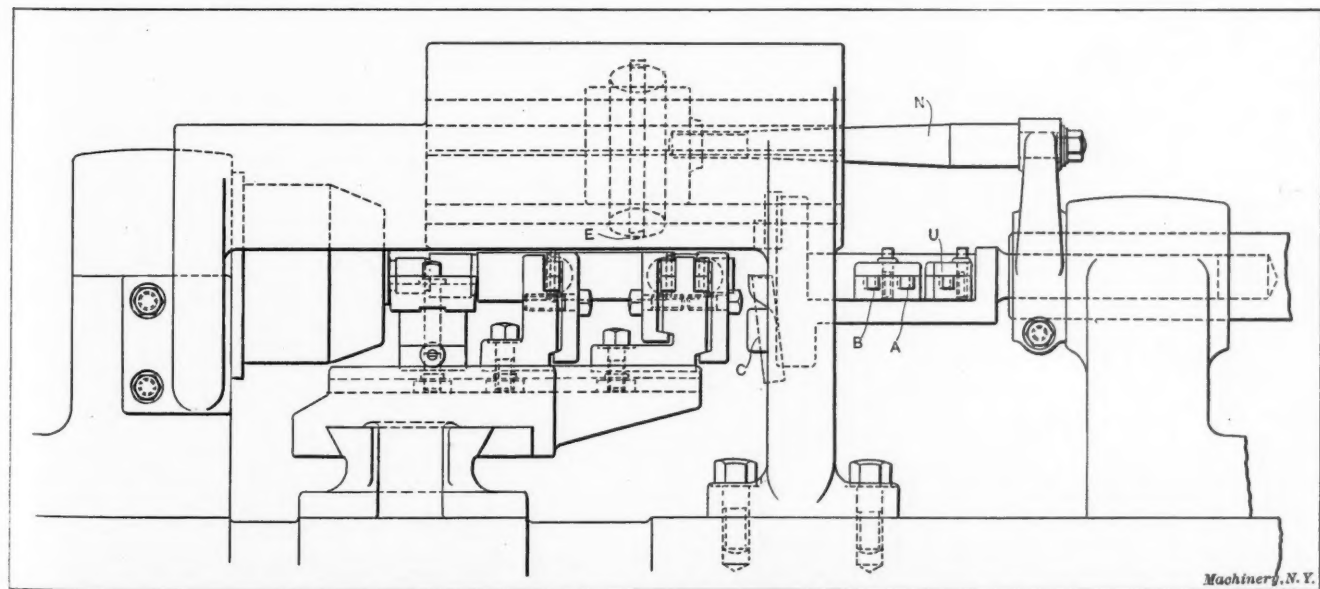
Front Elevation of Cleveland Machine arranged for Turning Shaft shown in Fig. 1
